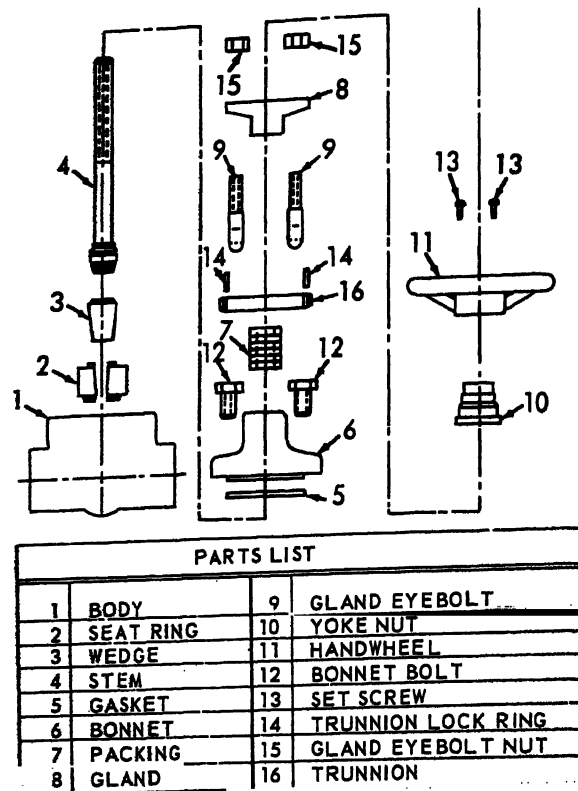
A. GATE VALVE ASSEMBLY AND DISASSEMBLY
